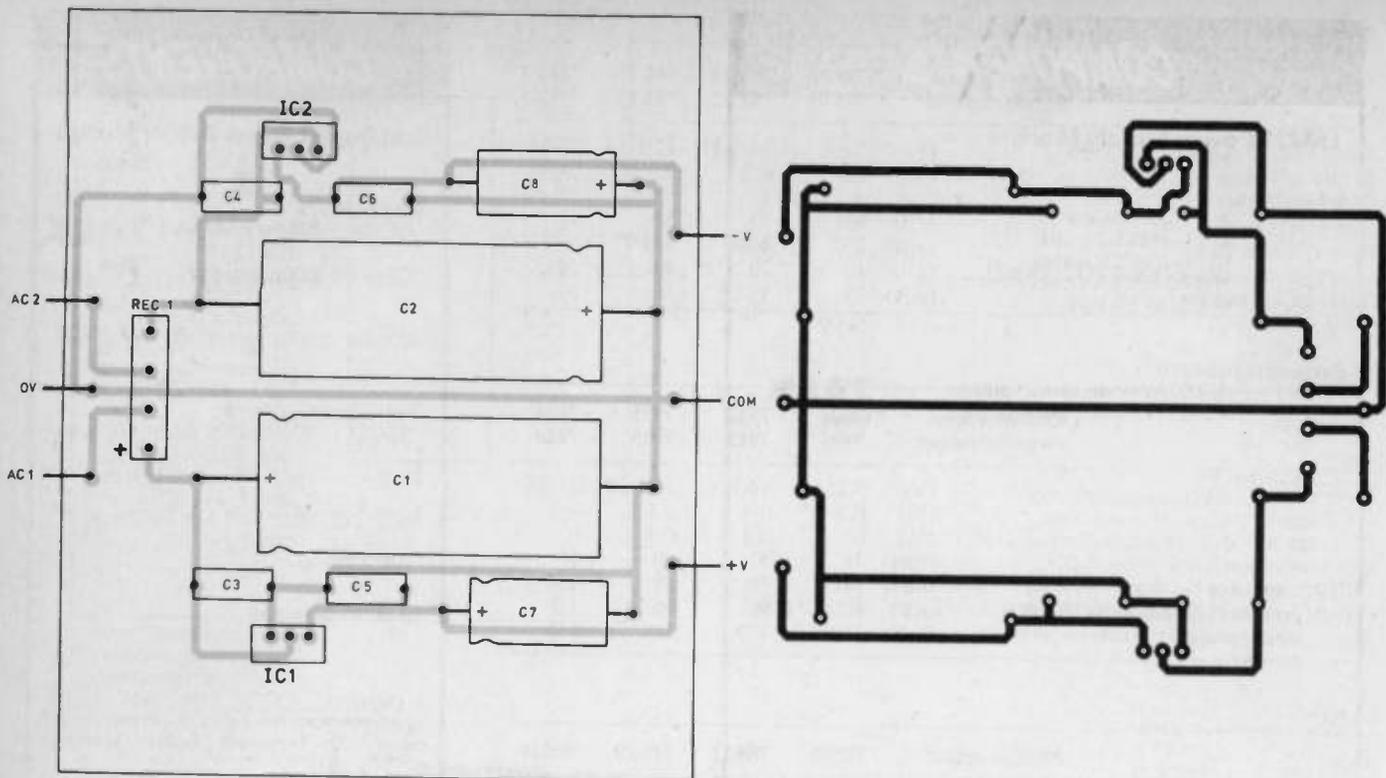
P.C.B. copper foil and component layout for the dual output power supply module
